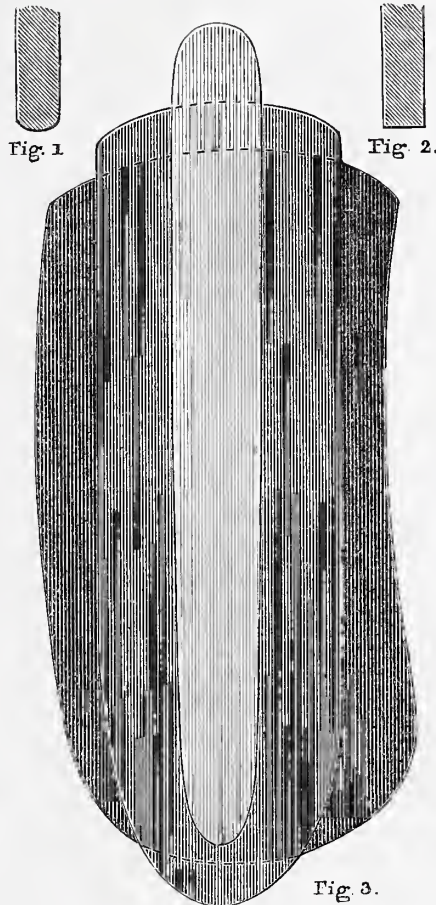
Edge wrongly formed. Fig. 2.—Edge rightly formed. Fig. 3.—Outlines of Shaped Scrapers.
